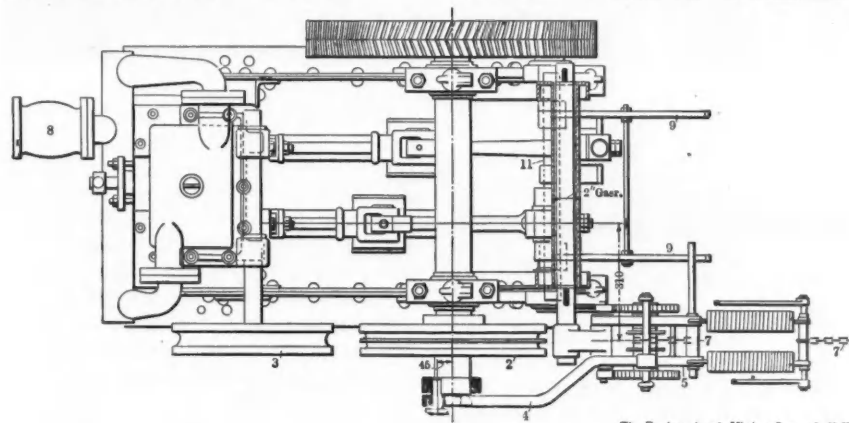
TOP VIEW OF COMPRESSED-AIR CUTTING MACHINE
